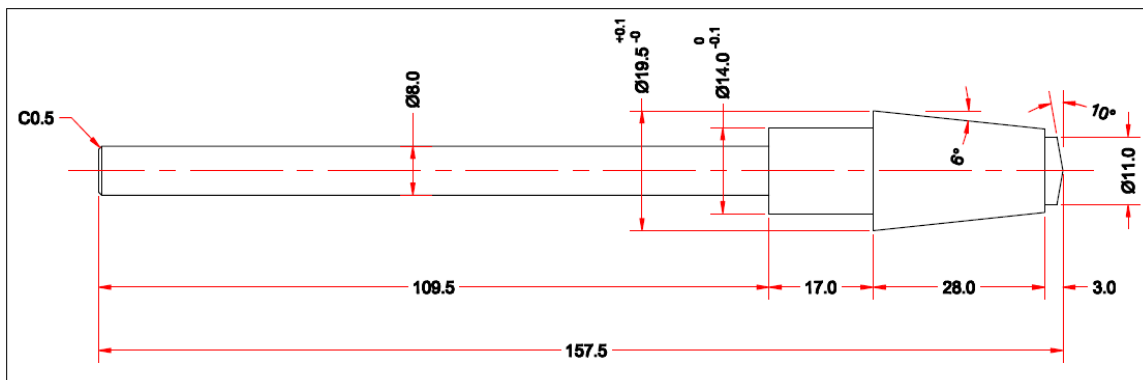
The dimension measurement of test specimen for fatigue test.
